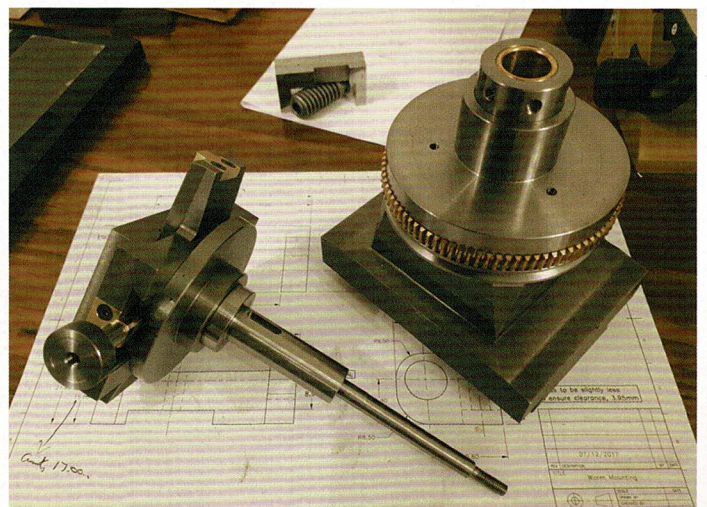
Detachable work holding compound table and sliding head with worm wheel.
